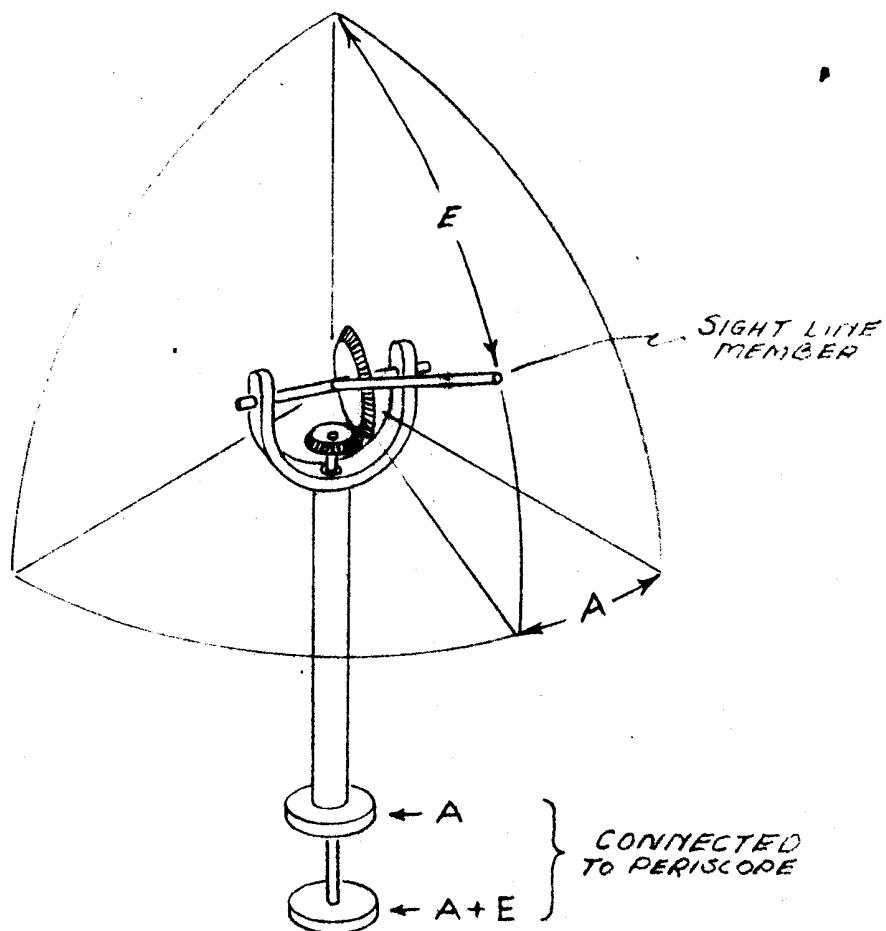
ANGLE CONVERTER OUTPUT GEARING
